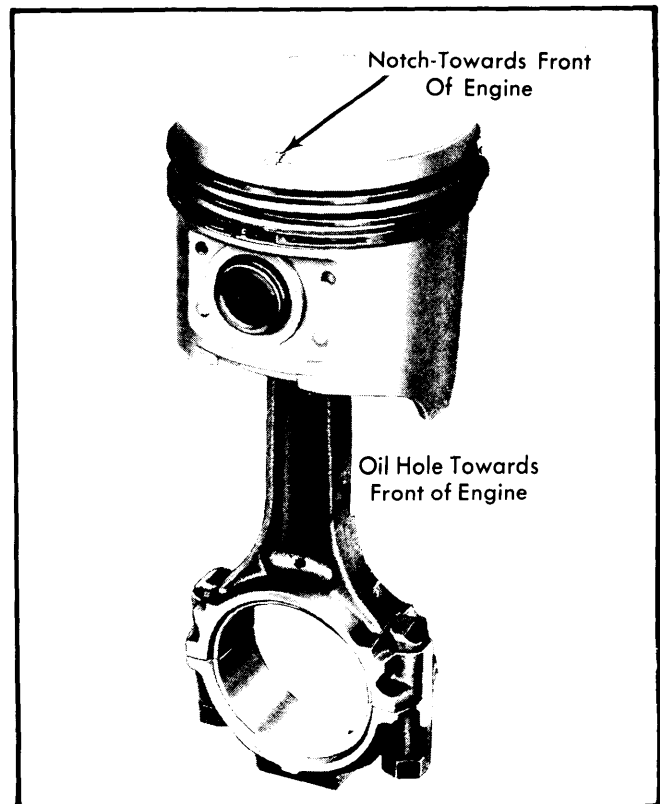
View Showing Correct Assembly of Rod-to-Piston
